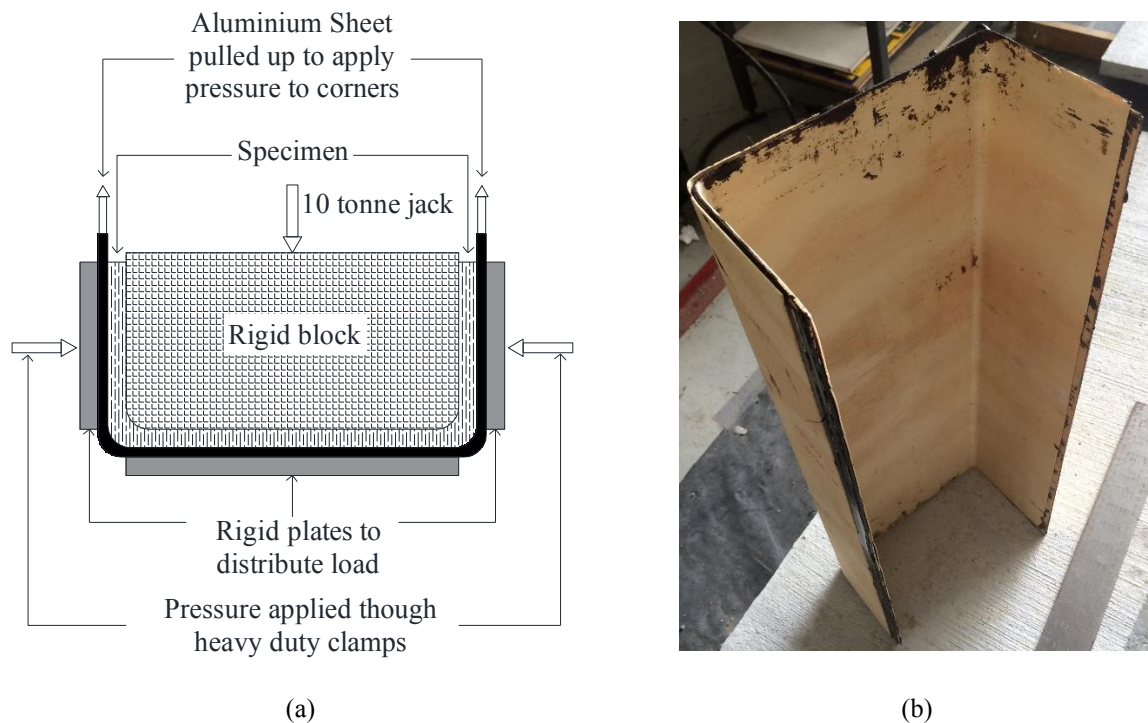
(a) Schematic of jig used to manufacture cee-sections (b) Finished untrimmed timber section
